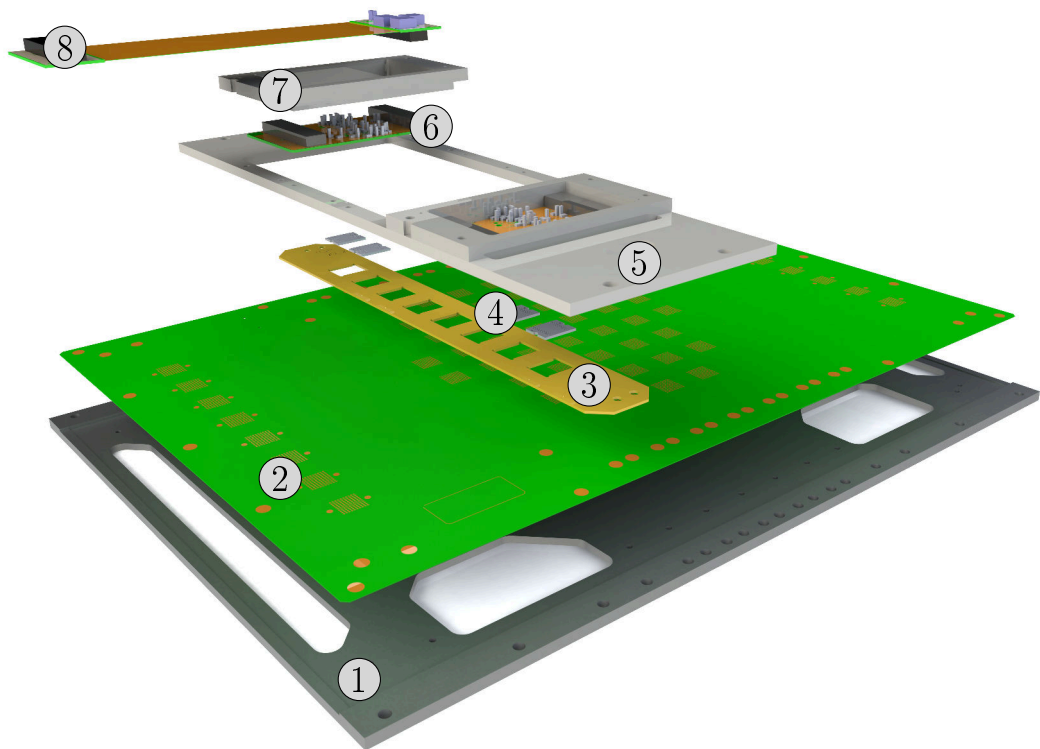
Explosion view of the DENSE prototype system. (1) DENSE mechanic frame, (2) DENSE board, (3) ZA1 stencil, (4) Samtec ZA1 connector, (5) DDC vertical holder, (6) Double Dense Connector board, (7) DDC holder, (8) IBoard-to-DDC flex-rigid board
